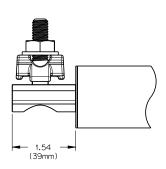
Medium parallel-groove terminal (#8-2/0 cable sizes) (-P)
